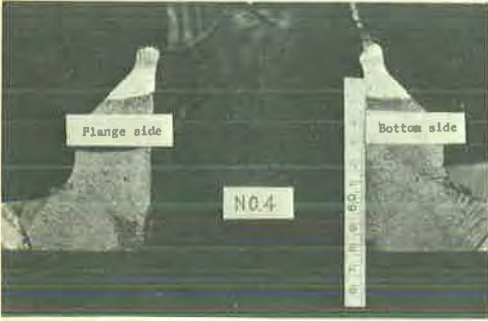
Photograph of cross section of No.4 nozzle after fatigue failure
